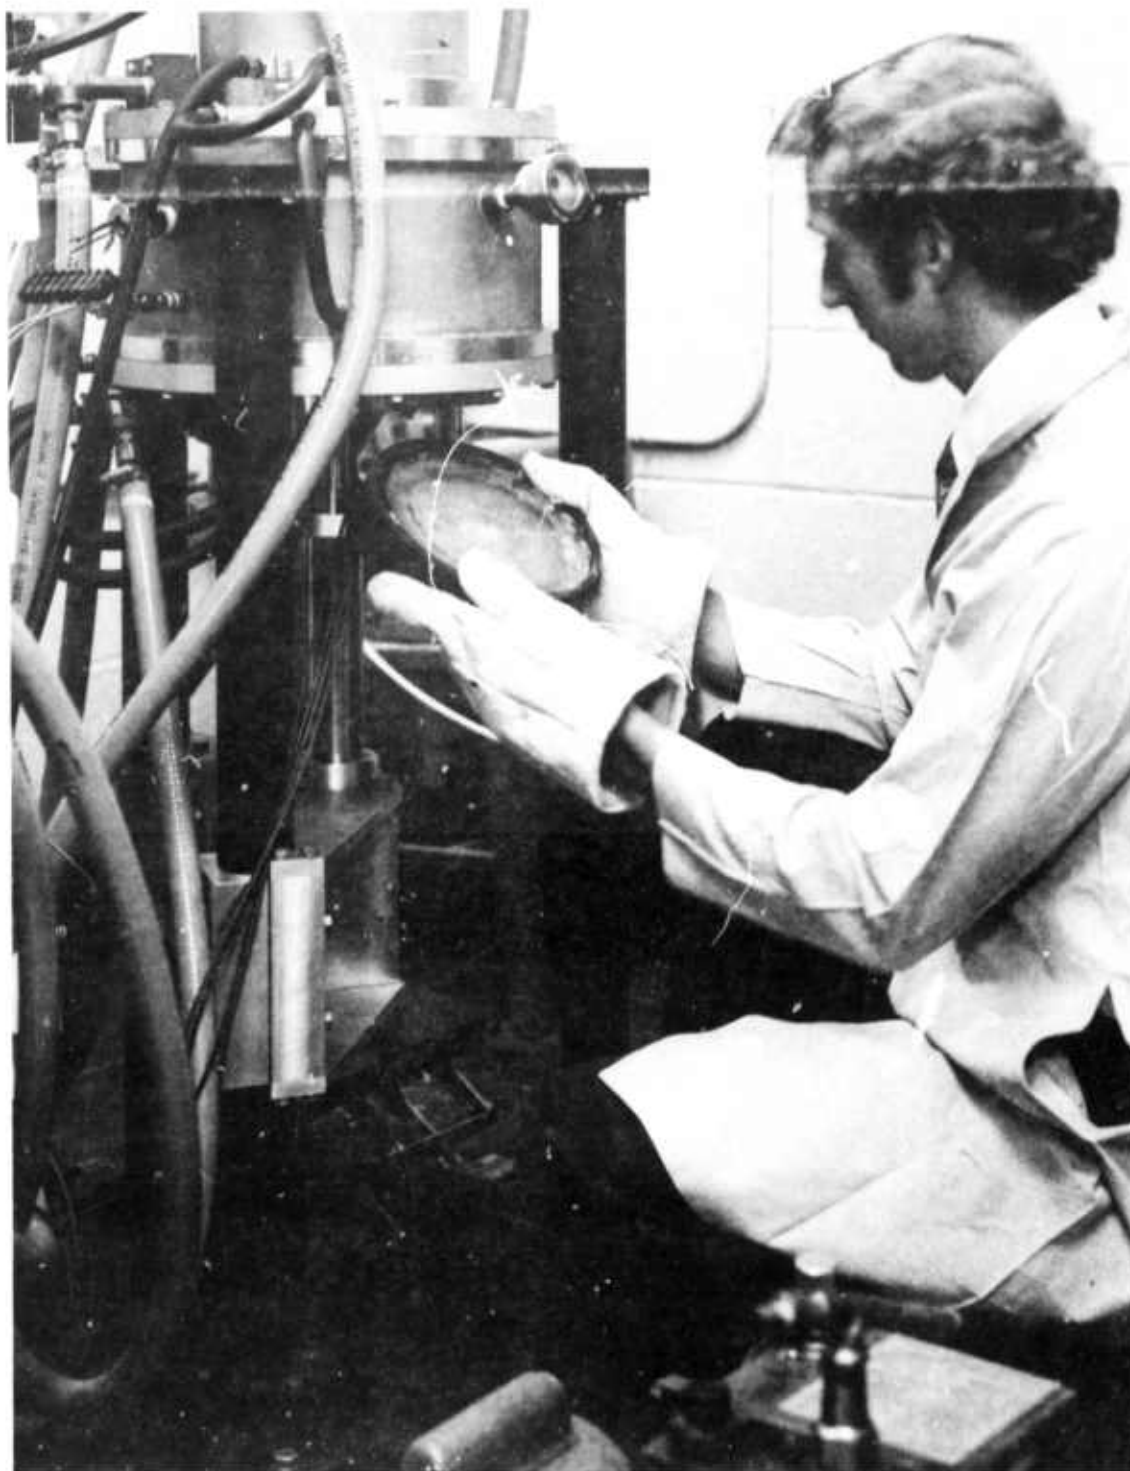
Removal of a KCl Casting from the Two Zone Casting Furnace.
